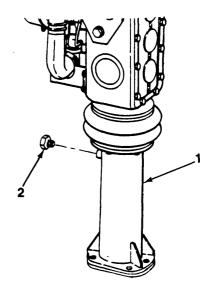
Draining and Filling Lower Unit Oil (VR11C).
